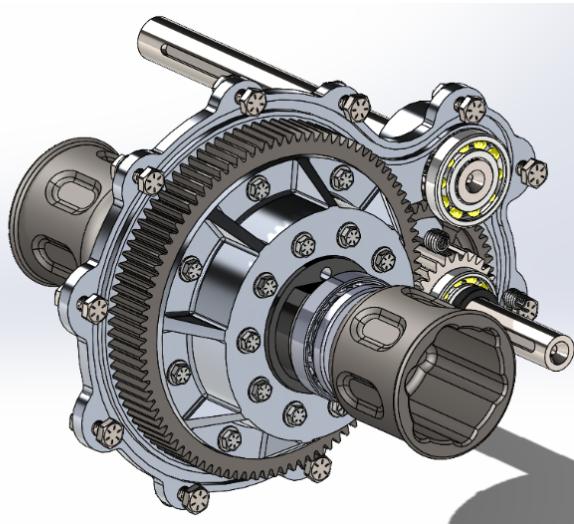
Full Rear Hardware Assembly Partial Cross Section
